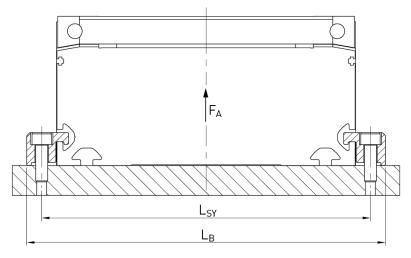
Mounting with clamping profiles - HT100L, HT150L
